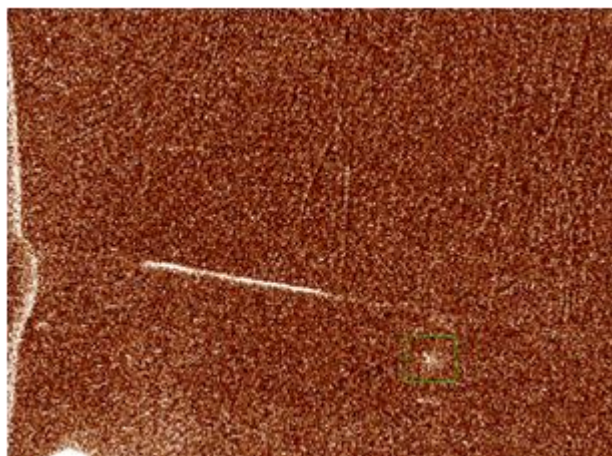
SIR INDICATION FROM 0.060 IN. CRACK IN BASELINE SPECIMEN 2B
